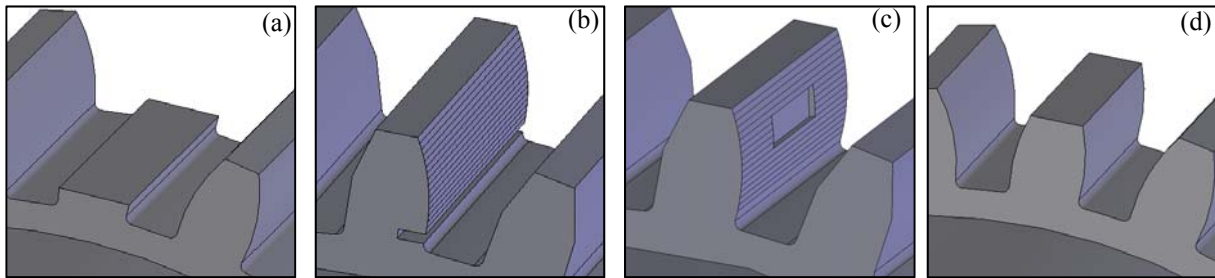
Model representations of (a) missing tooth, (b) root crack, (c) spall and (d) chip.
